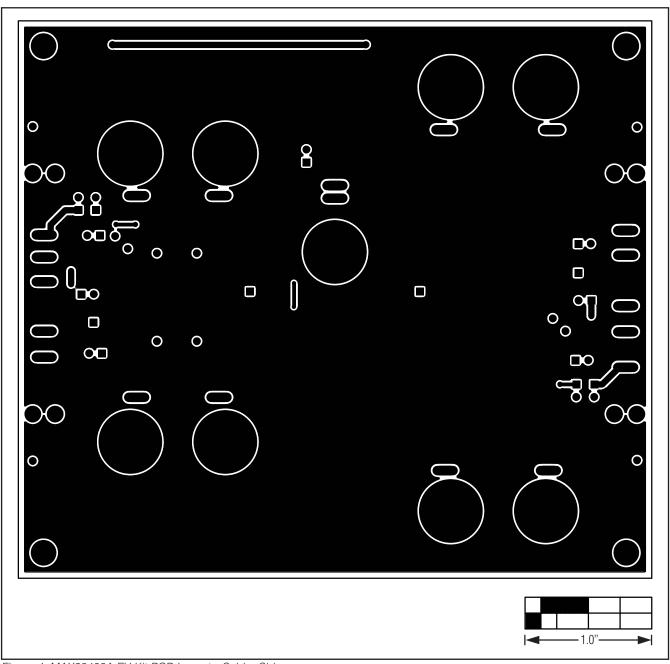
MAX98400A EV Kit PCB Layout—Solder Side
